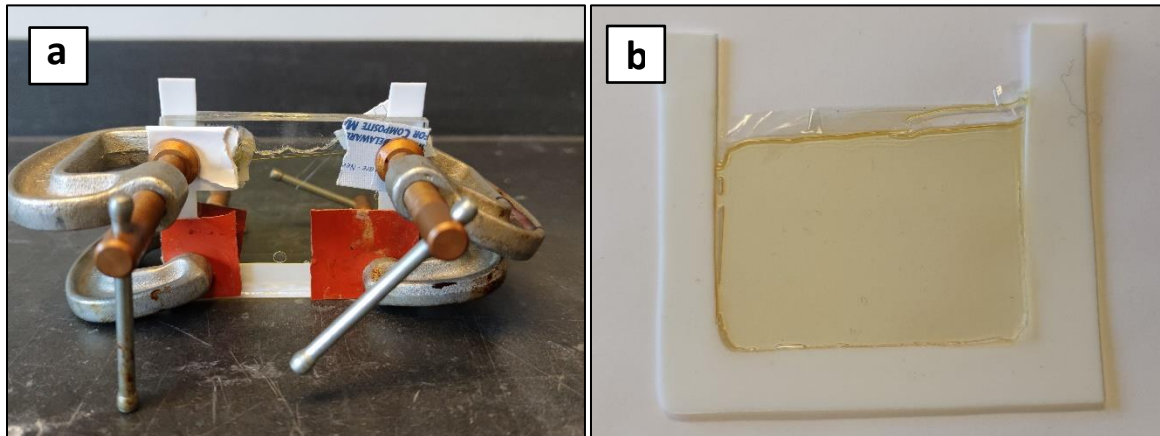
Used mold for casting plates (a) and demolded polymerized Elium 1880 sample (b).
